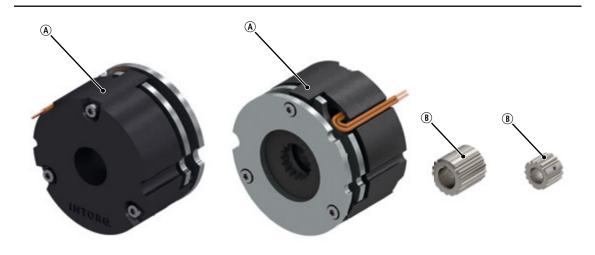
INTORQ BFK551 spring-applied brake (left figure: mounting on flange side; right figure: mounting on housing side)
